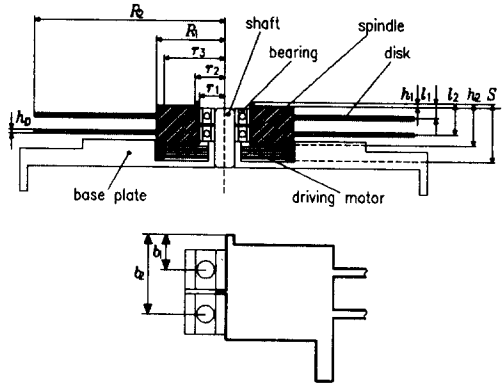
Cross-sectional view of the model #1 (HDD spindle system)
